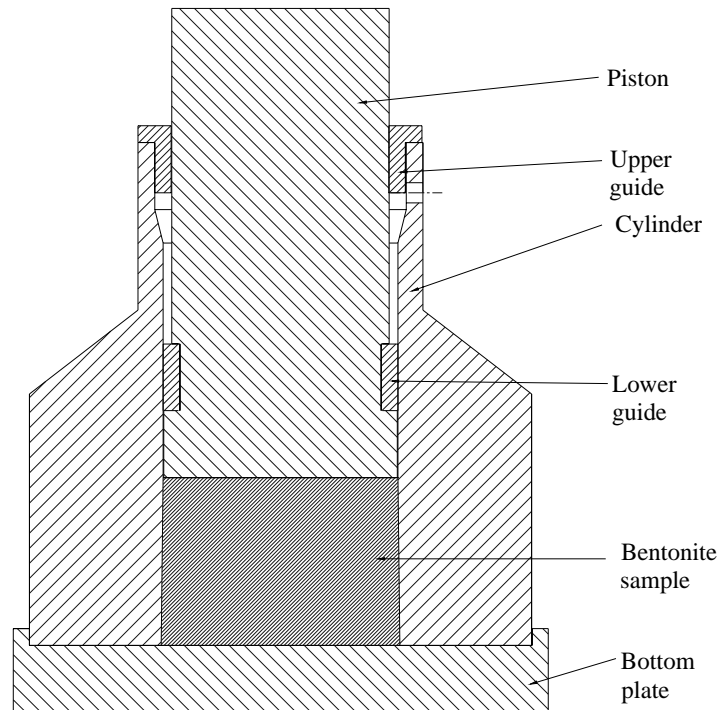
Schematic drawing of the equipment used when producing the bentonite plugs.
